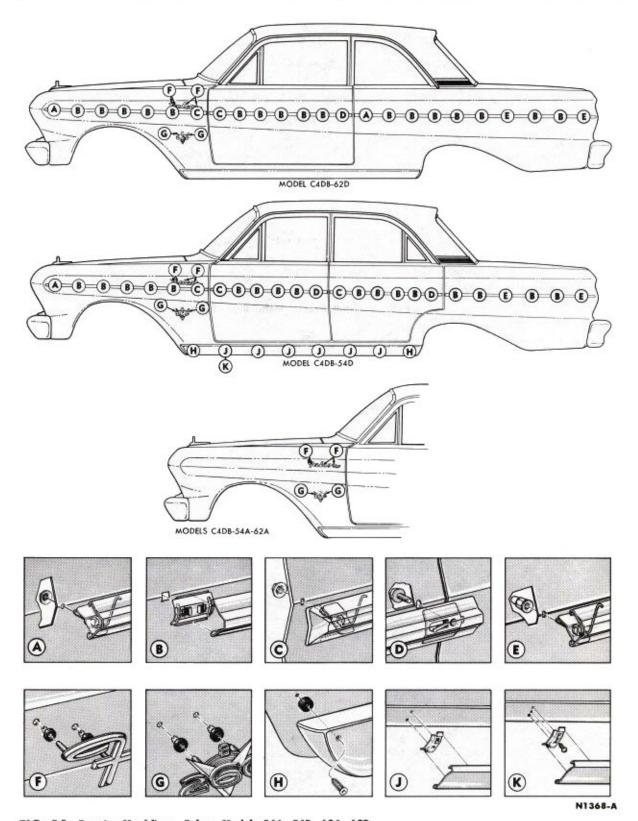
Exterior Mouldings—Falcon Models 54A, 54D, 62A, 62D
